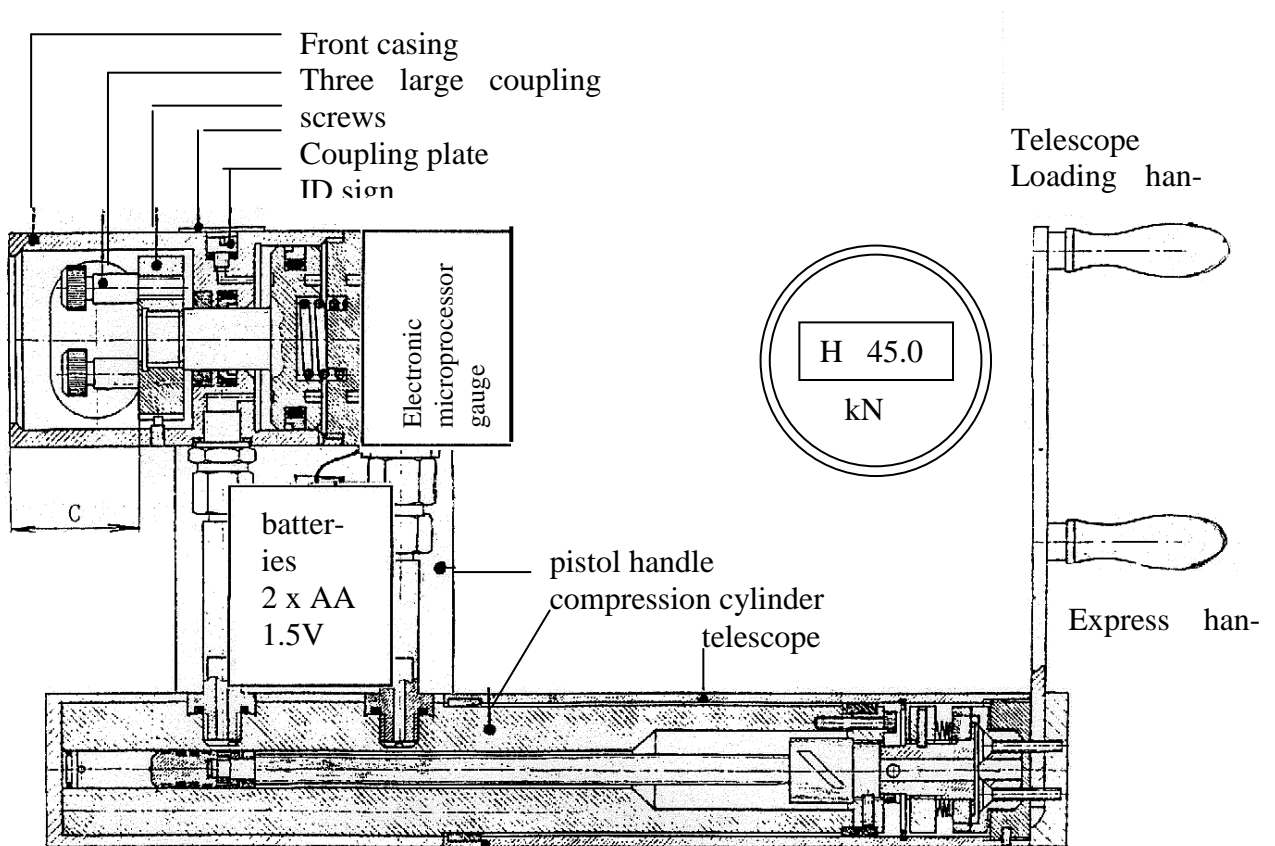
The Capo-Test C-104 hydraulic pull machine, in principle.
